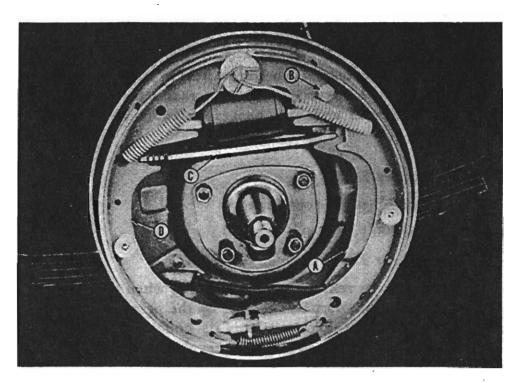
Showing Rear Brake Support Plate and Parts Actuated by the Hand or Parking Brake Lever.
